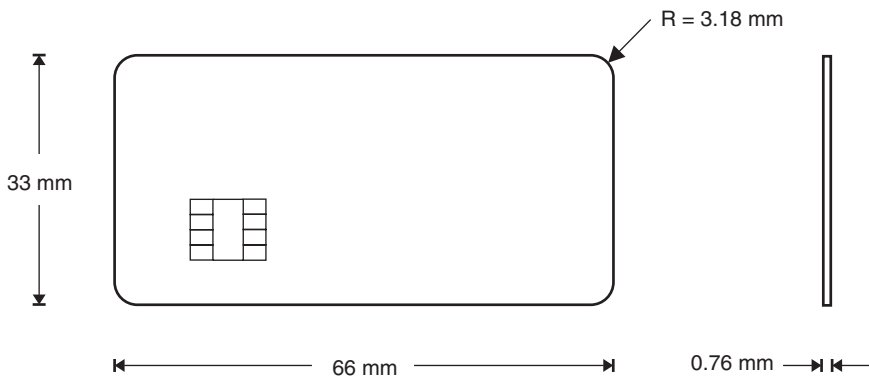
The ID-00 format. Thickness: $0.76 \pm 0.08\text{ mm}$; corner radius: $3.18 \pm 0.30\text{ mm}$. The indicated dimensions show the size of the card excluding tolerances
